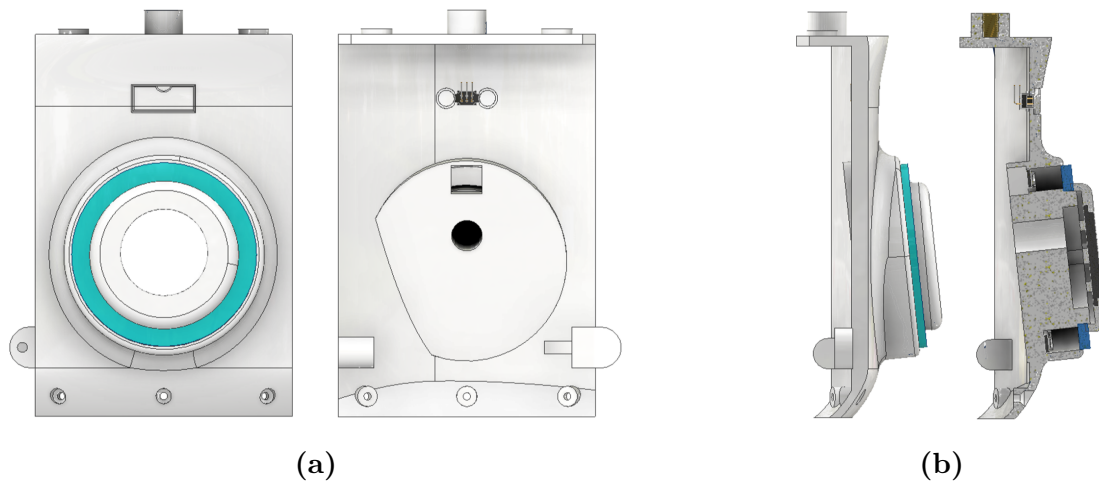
Details of the head lateral panels: (a) Front and back views, (b) Side view and cut view.
